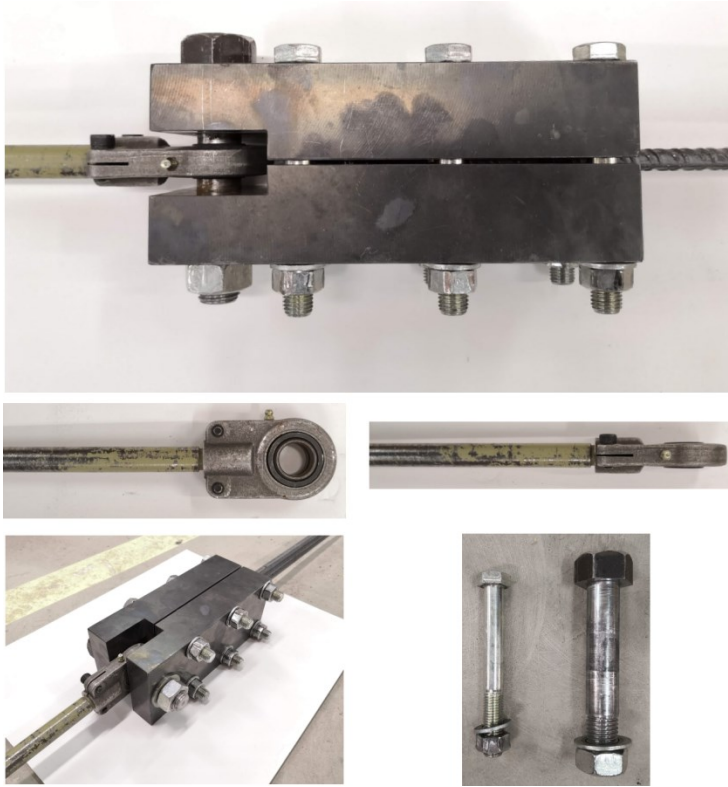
4: Bearing connection and connecting system steel rod to steel jaw.
